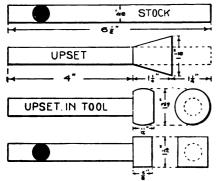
FORMING A SQUARE-HEADED BOLT.
